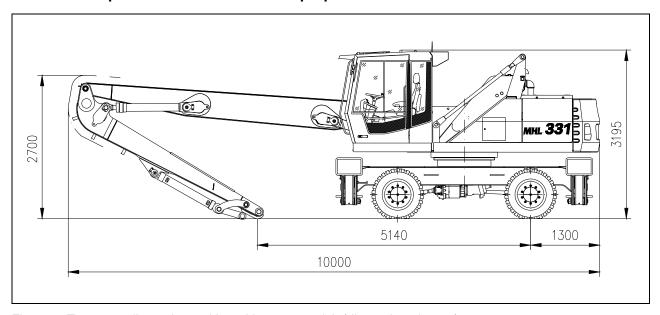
Transport dimensions with multi-purpose stick (dimensions in mm)
